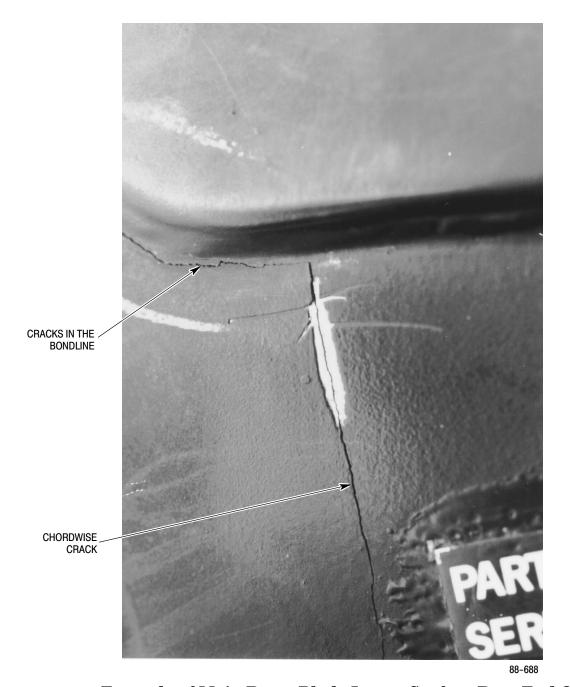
Example of Main Rotor Blade Lower Surface Root End Cracking.
